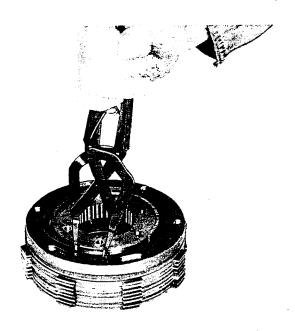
Removing Clutch Hub Snap Ring (T-35070)
